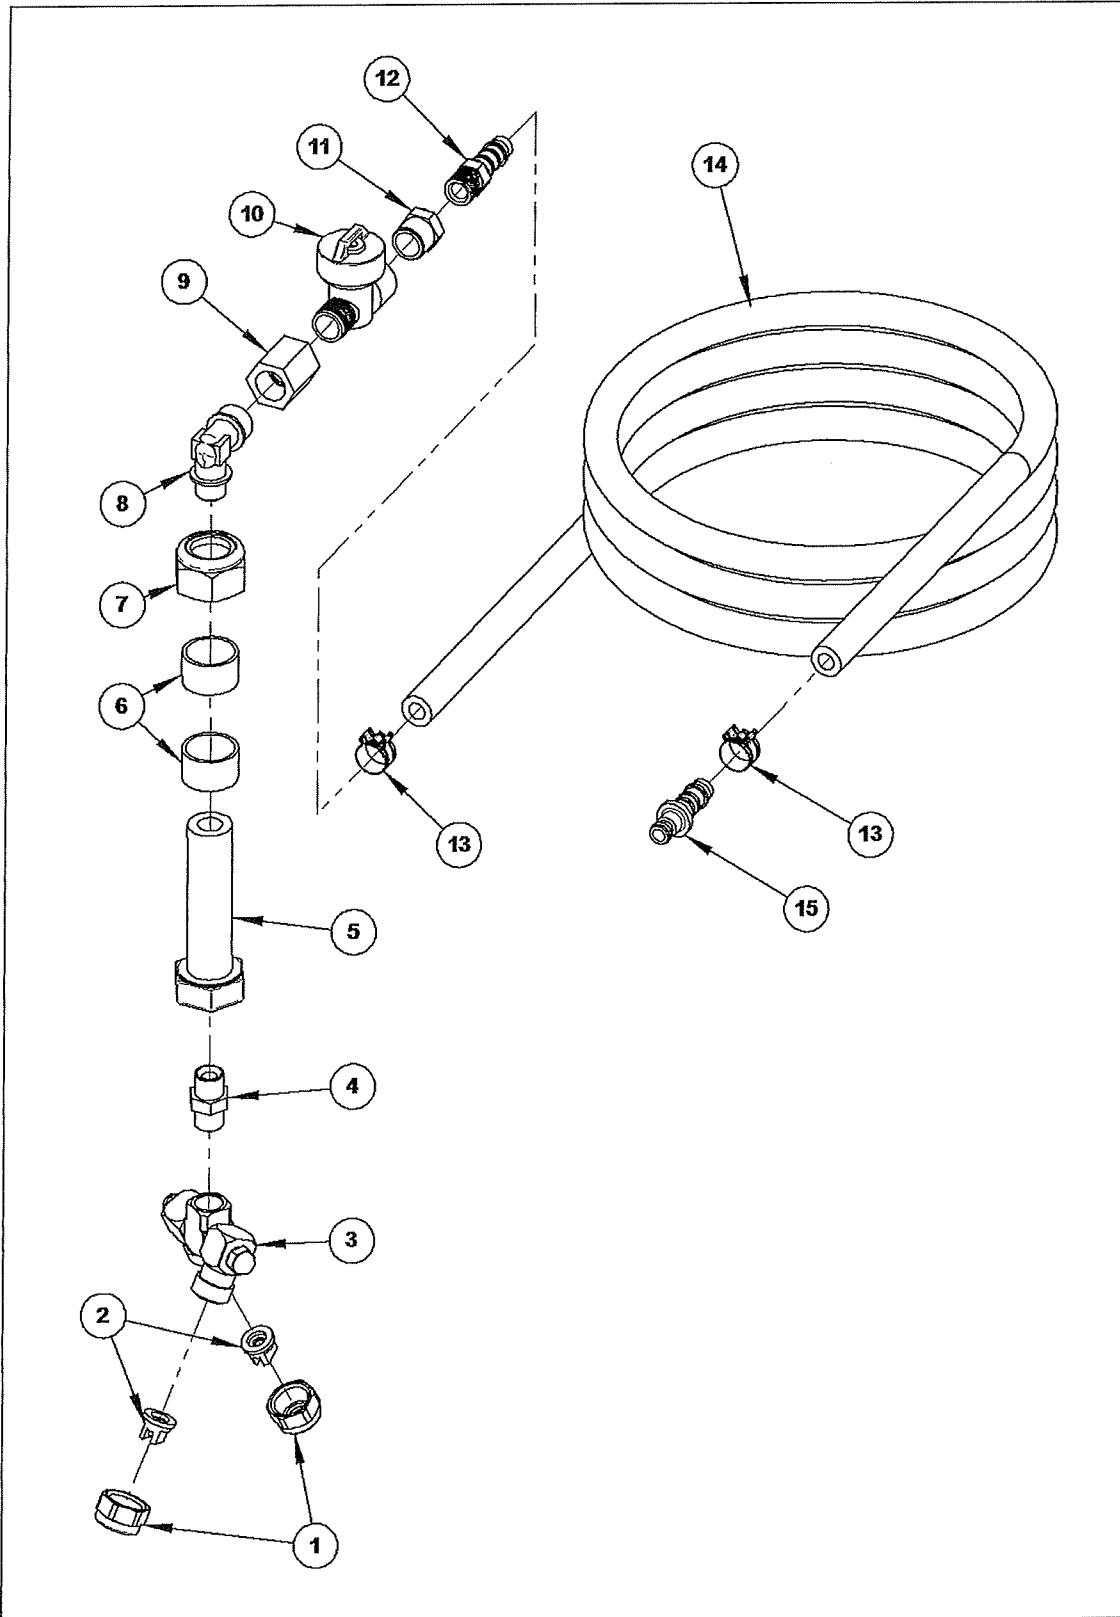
Hi-Flo Nozzle Assembly, Twin
